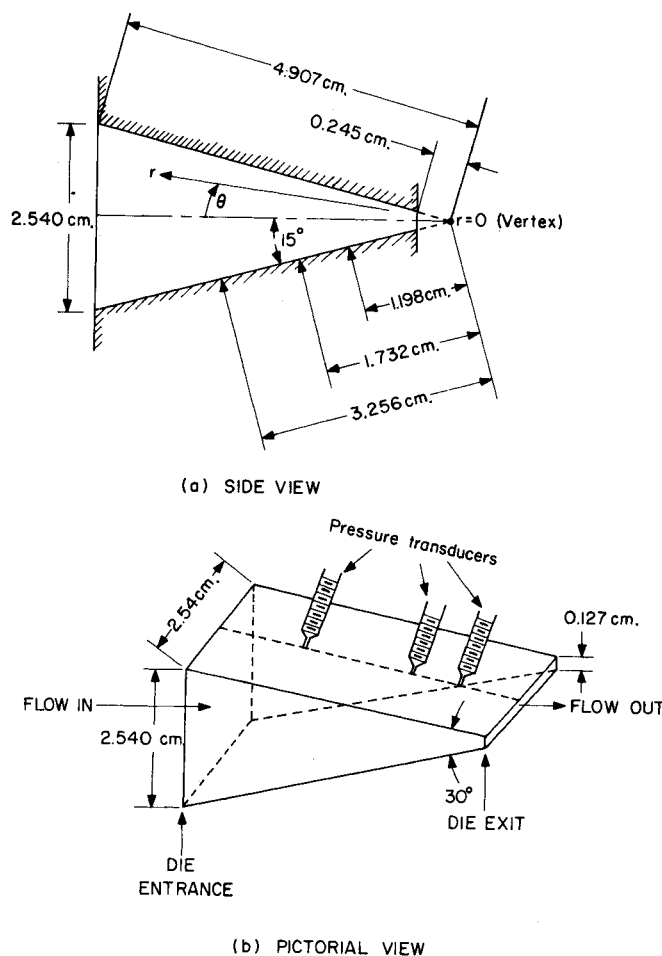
Details of the converging channel die design: (a) side view; (b) pictorial view.
